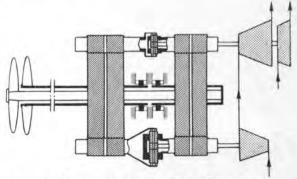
Two single-plane parallel shaft gears and pair of epicyclic primary gears.
